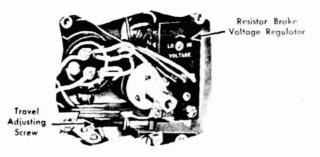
Interior of motor actuator showing travel adjusting screw.
